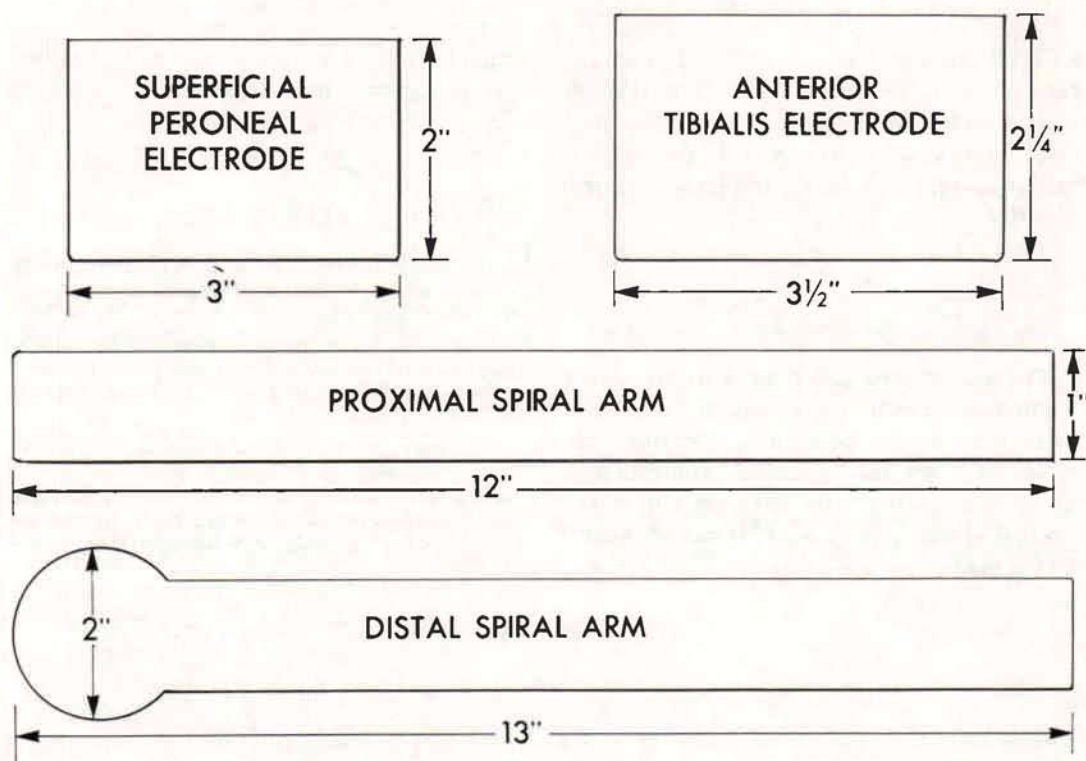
Dimensions of templates for use in fabrication of the spiral retention clip.
